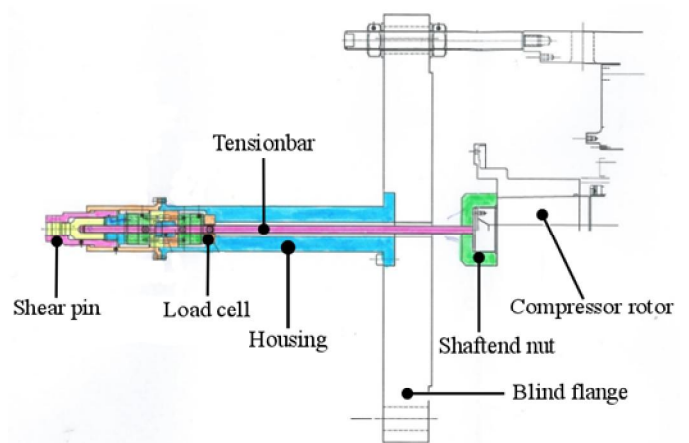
Shear Pin Tool for Static and Dynamic Axial Load Tests
